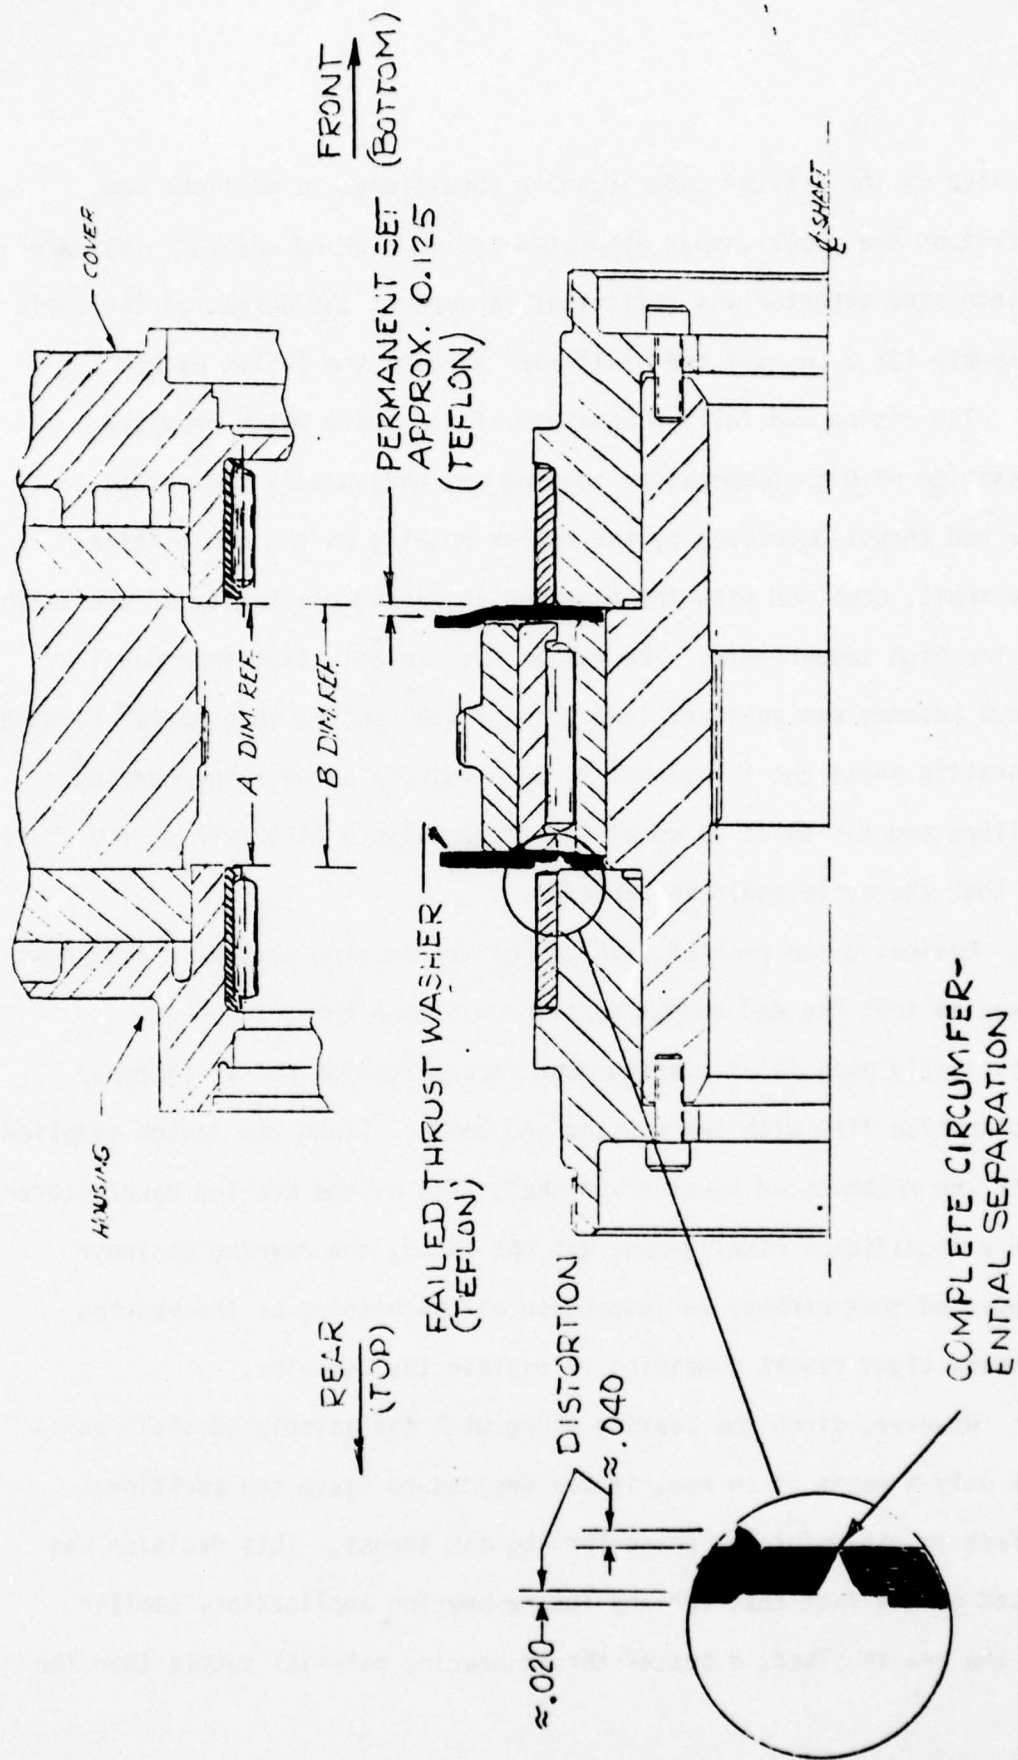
Exploded View of Motor Cartridge Test Unit Showing Failed Teflon Thrust Washer
